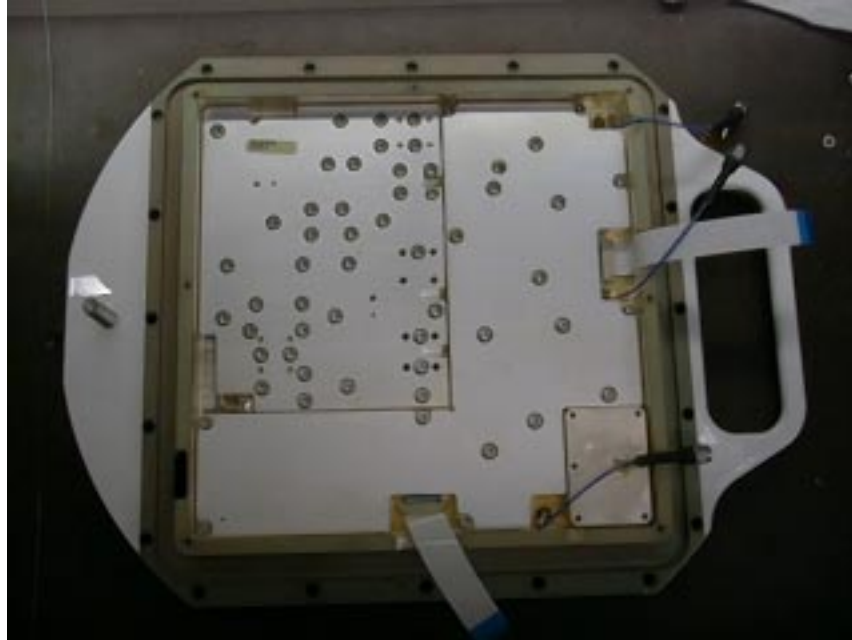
Housing with the Translator Printed Wiring Board Assembly removed, showing the cover plates installed over the Millimeter Wave and Microwave Assemblies.
